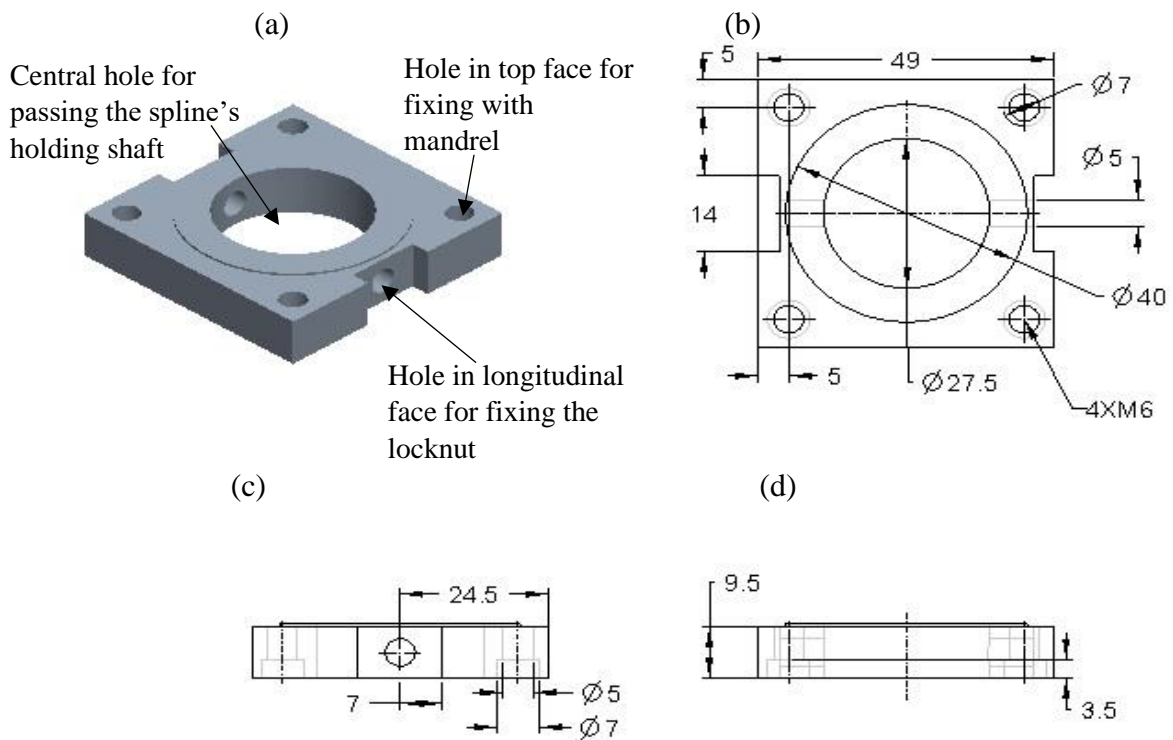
(a) 3-D view, (b) top view, (c) side view, and (d) front view of the CAD model of locknut supporting plate of the in-situ MRH tool.
